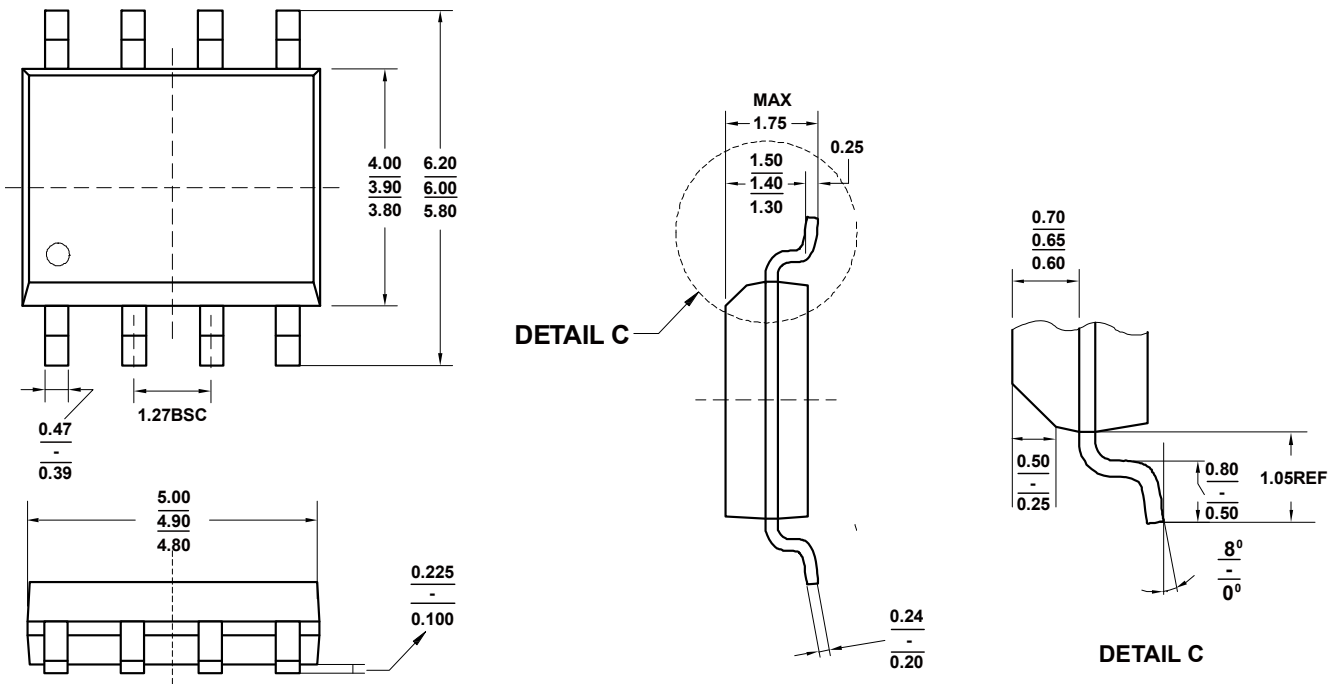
8-Lead SOIC Package Dimensions shown in millimeters
